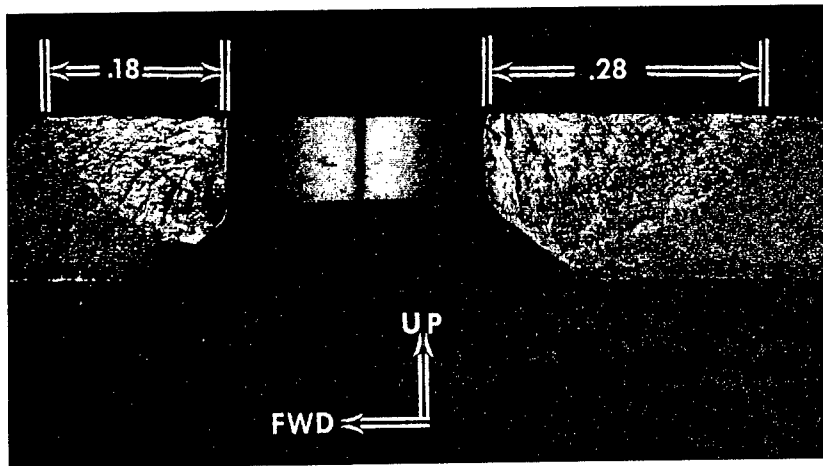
Largest Skin Crack, Hole 26, Section 5, CZ-184
